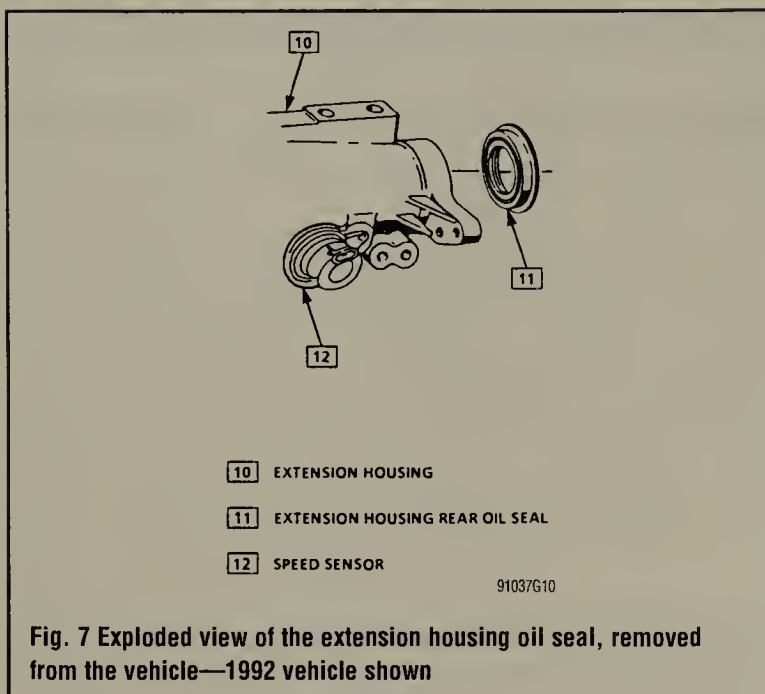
Exploded view of the extension housing oil seal, removed from the vehicle—1992 vehicle shown
